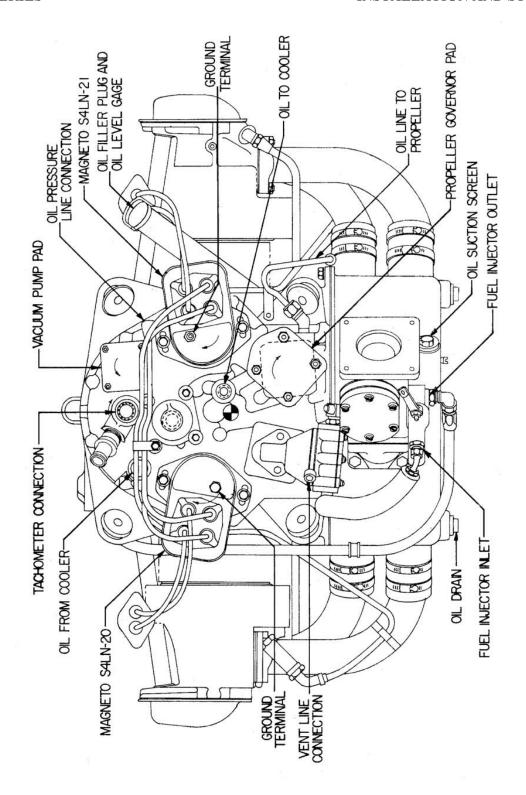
Installation Drawing – Rear View – Typical IO-320-B Series
